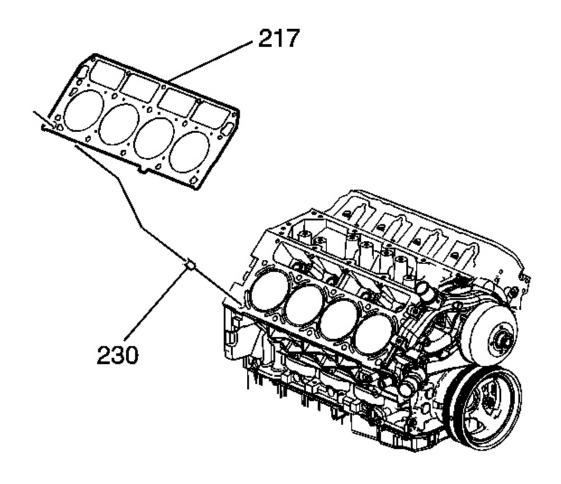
Cylinder Head Courtesy of GENERAL MOTORS CORP.
